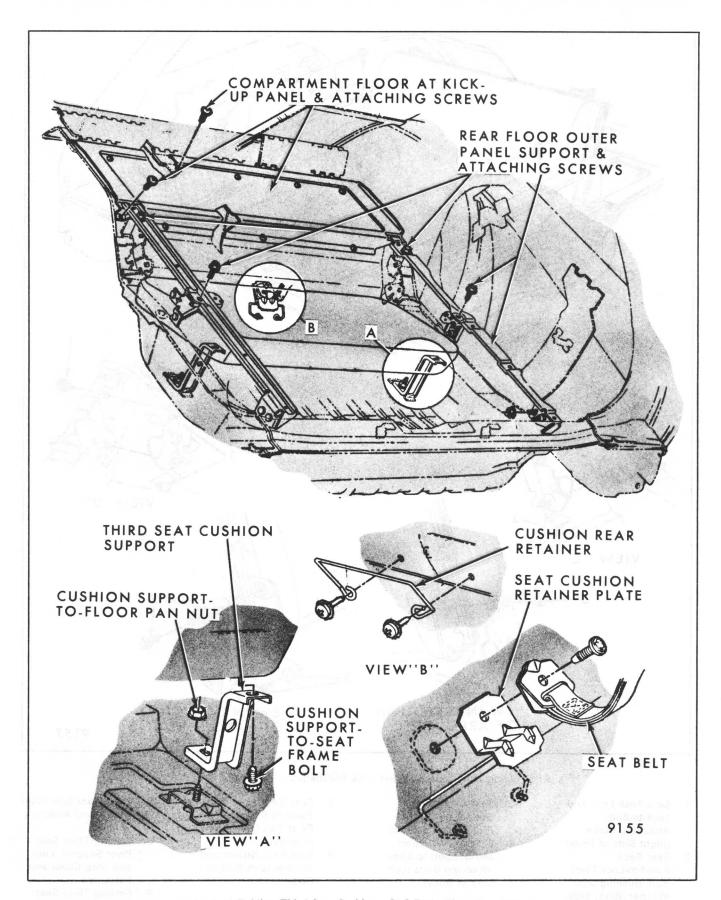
Folding Third Seat Cushion - "A" Body Three-Seat Styles
